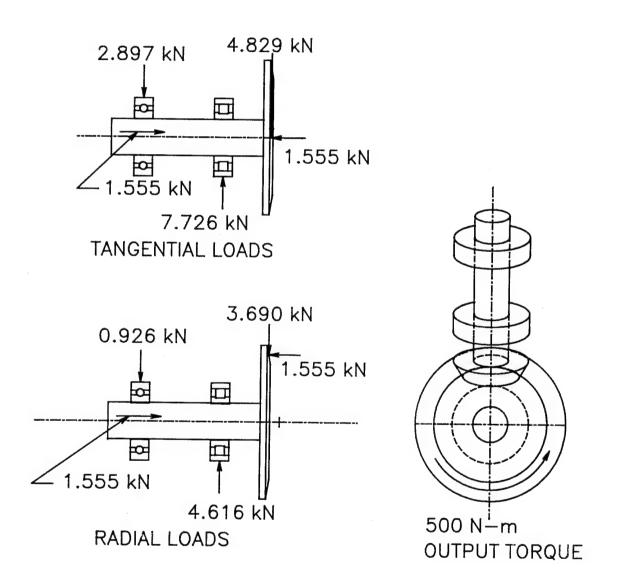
OUTPUT GEAR SHAFT LOADING FOR SPIRAL BEVEL EXAMPLE
